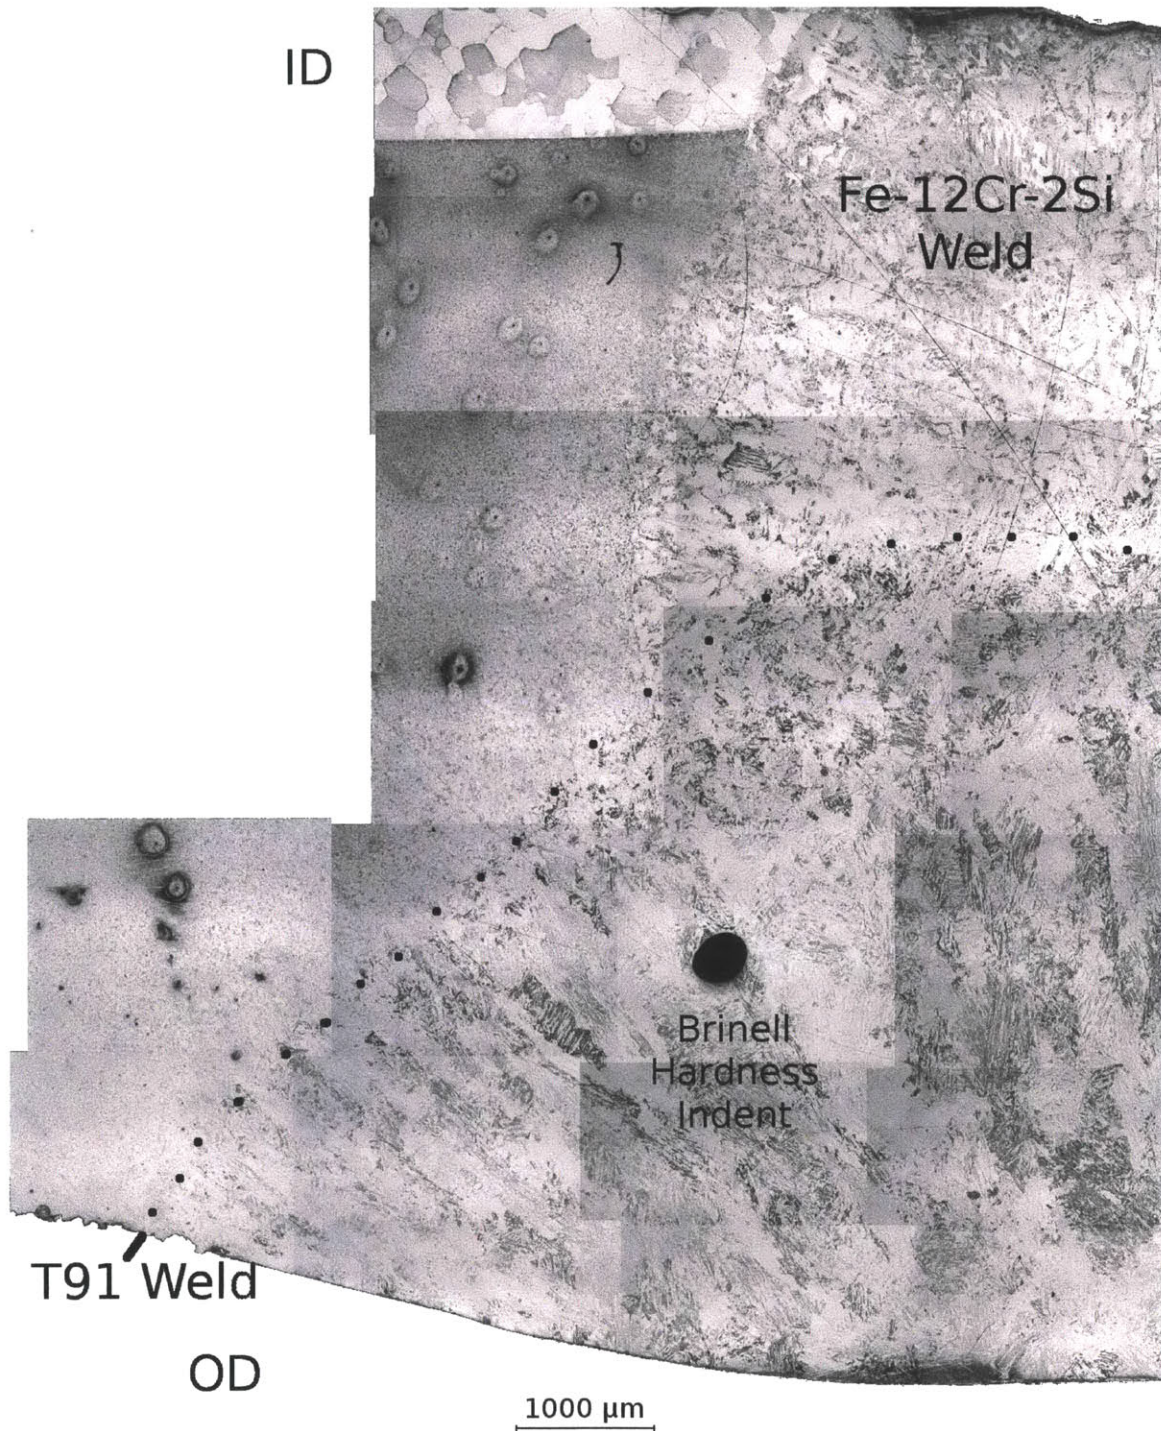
Photo montage of the ASME-certified ID-clad weld, made by grinding a double bevel, filling the weld to 2.5 mm (0.1") with Fe-12Cr-2Si and finally backfilling the weld with F91 weld wire. The boundary between the two welds has been delineated with black dots. Note the lack of any appreciable HAZ, showing that the proper quench and tempering heat treatment for F91 was performed. Individual images were taken at 50 $\times$ .
